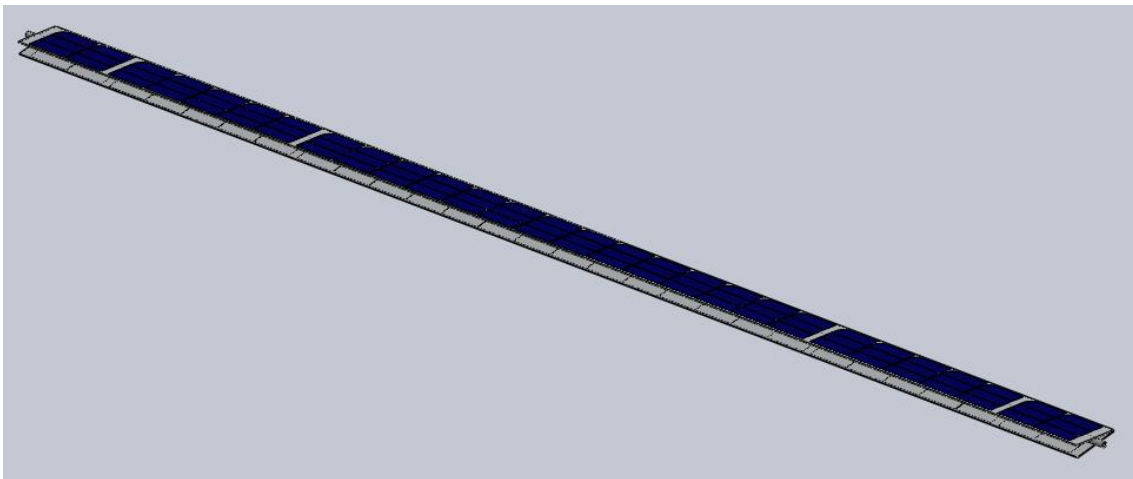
Type 1 receiver design with cooling and sheets in triangular shape
